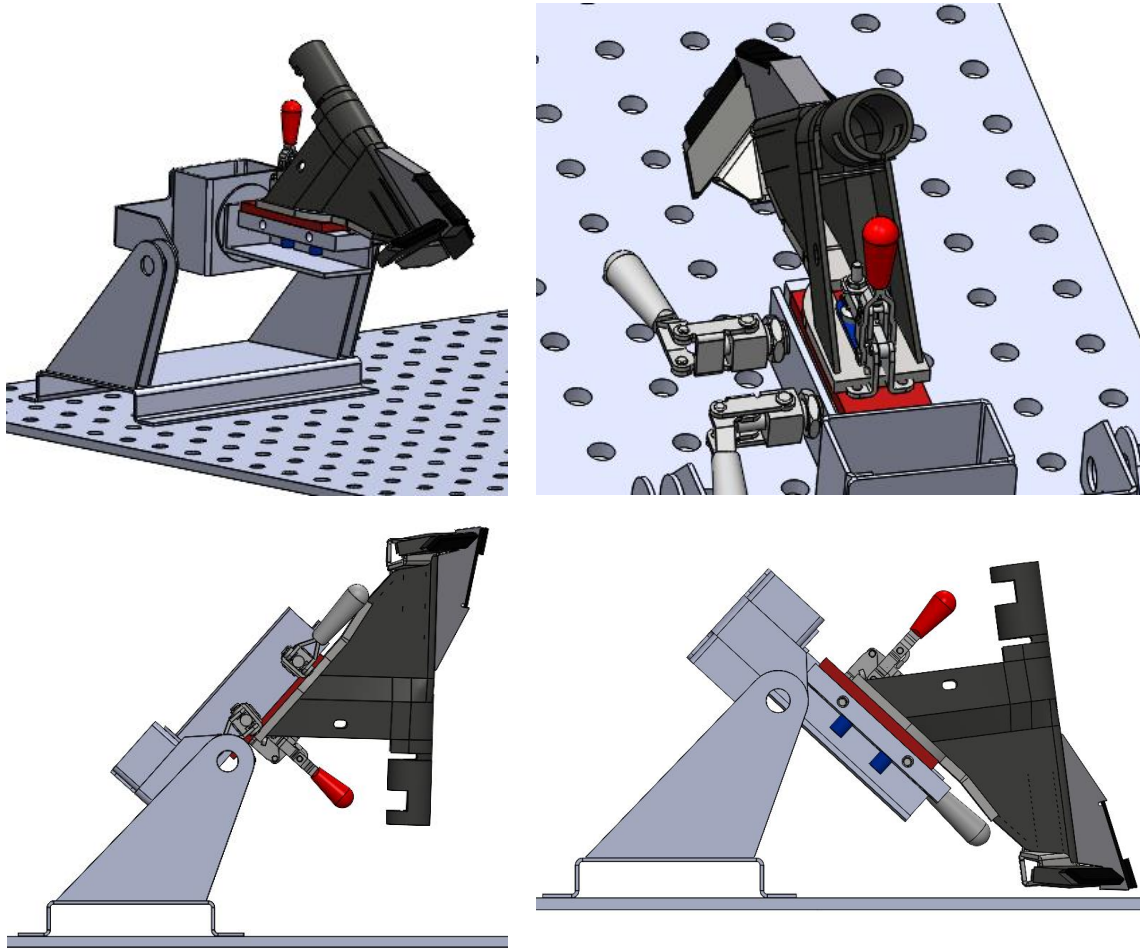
The angled hinged tilt rotary table with universal puller bar.
